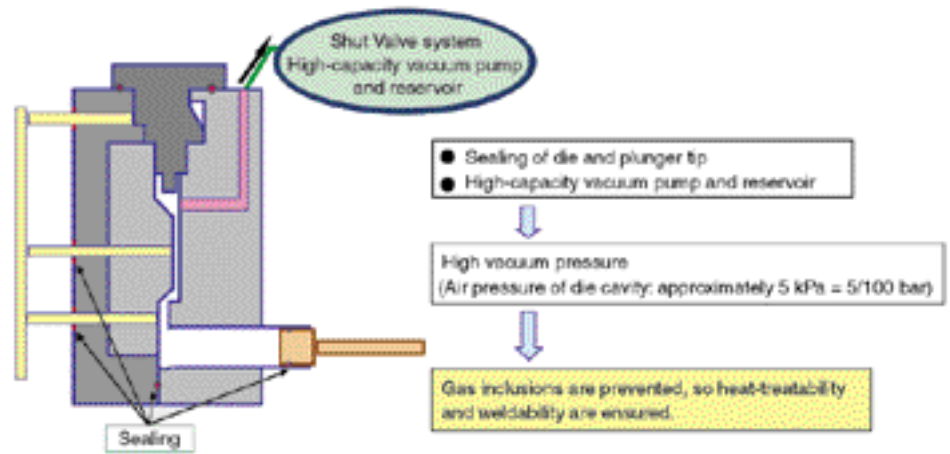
Schematic diagram of high-vacuum die-casting molds
